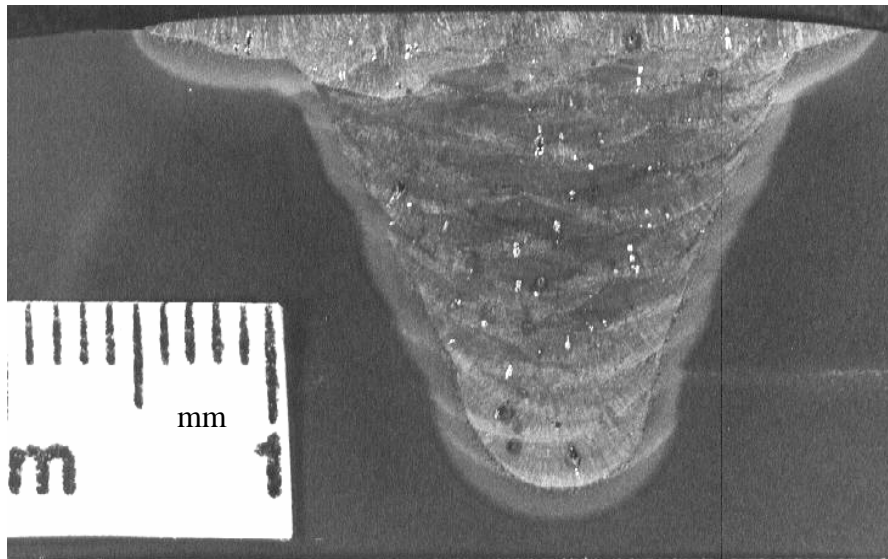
Macro-section and top bead microstructure from 2T3B3 V-groove weld
